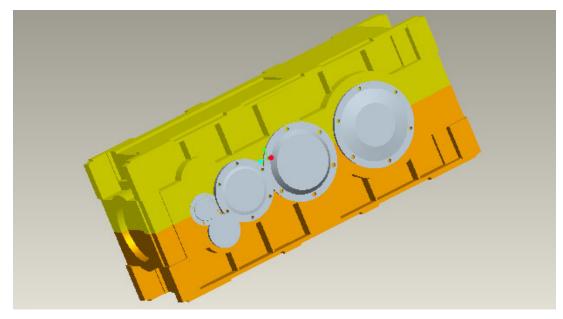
BACK VIEW OF ASSEMBLY WITH INTERNALS
